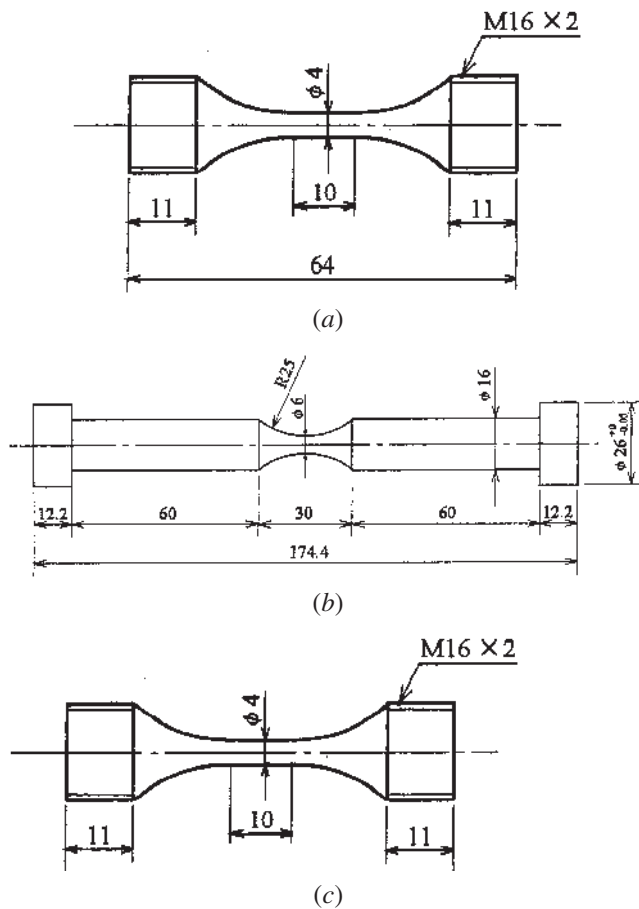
Shape and size of (a) tensile specimen and (b) and (c) fatigue specimens. All dimensions in millimeters.
